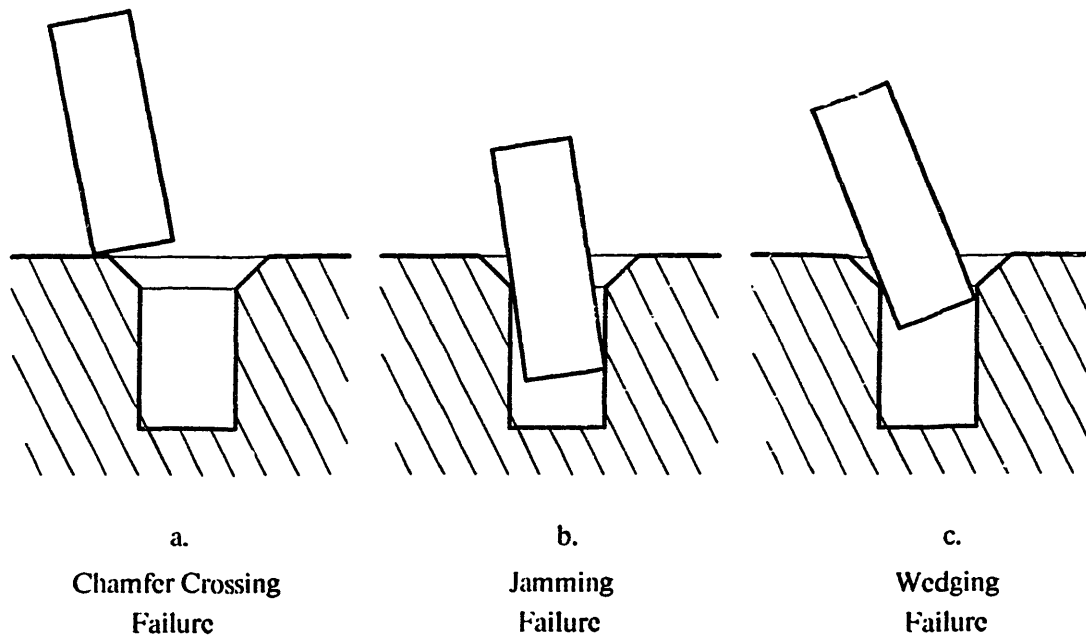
Failure modes for the peg in hole assembly. a. Initial translational alignment is not within chamfer limits. b. Jamming occurs. c. Wedging occurs.
